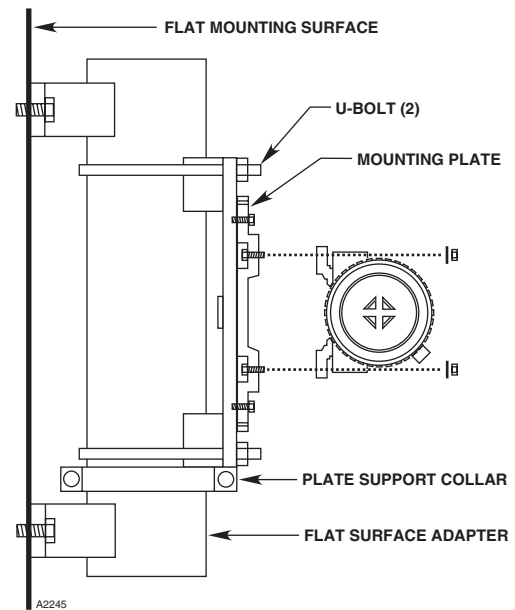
OPECL Gas Detector Mounted to Flat Surface using Flat Surface Adapter
